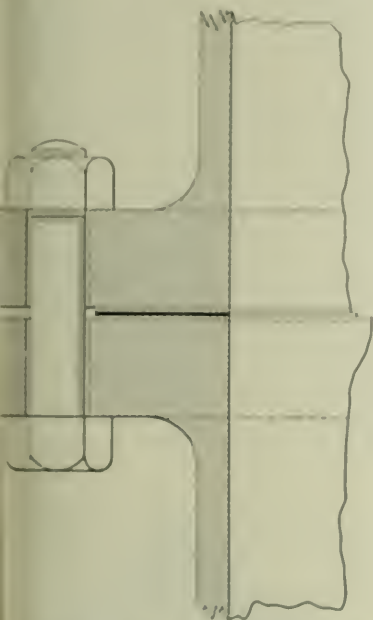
FLANGE WELDED TO PIPE.
